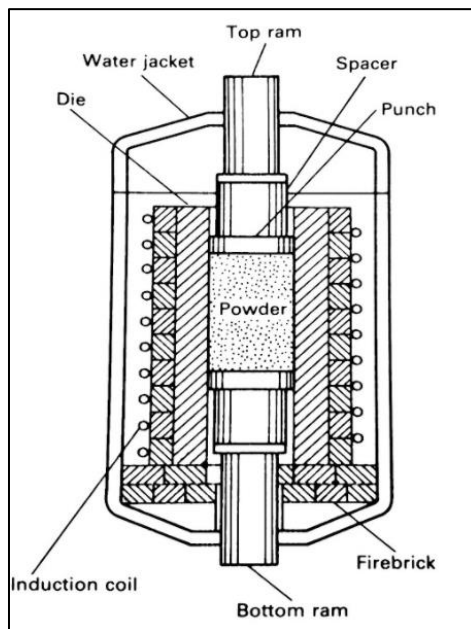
Cross section of graphite die assembly inside of induction heated vacuum furnace chamber, with hydraulically activated rams. From [42]
